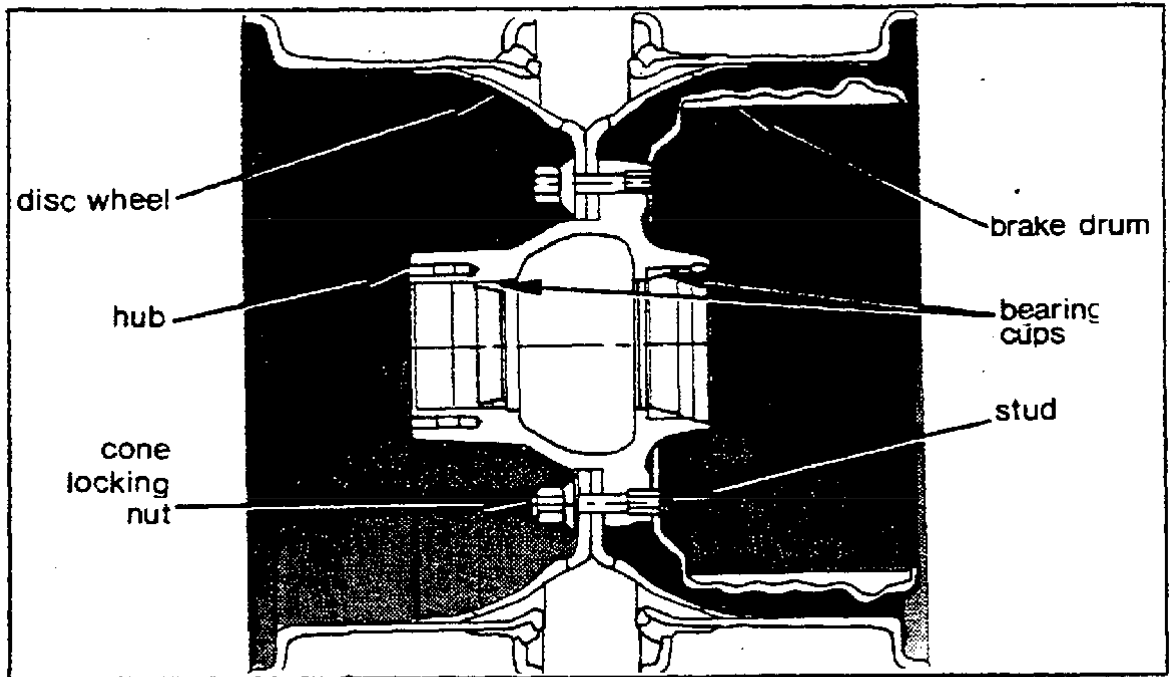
Dual Disc Wheels, Three-Piece Lock Rim with Cone Nut Securement
